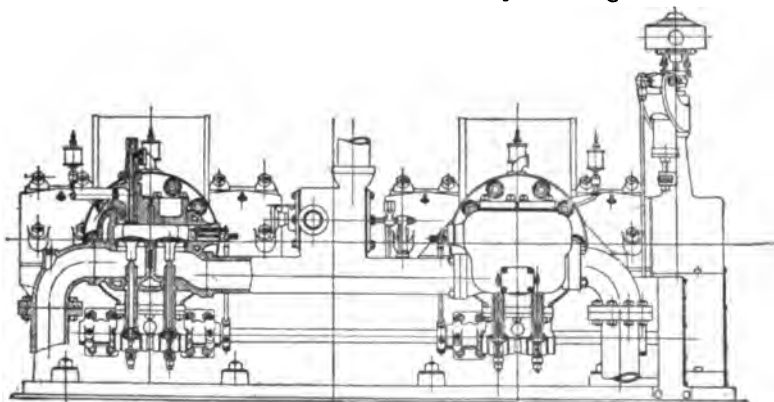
Cross-section through Valve Chest, Warren Two-cylinder Engine.
